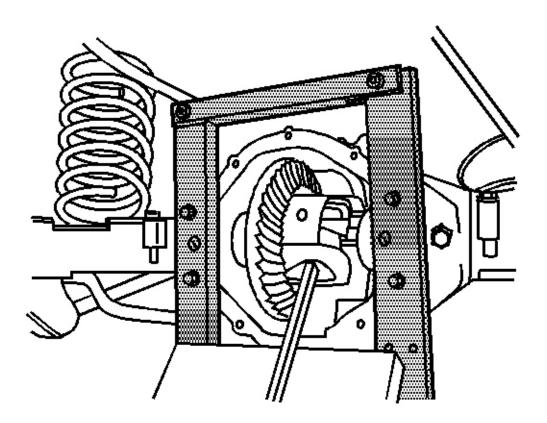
J 45222 Courtesy of GENERAL MOTORS CORP.
